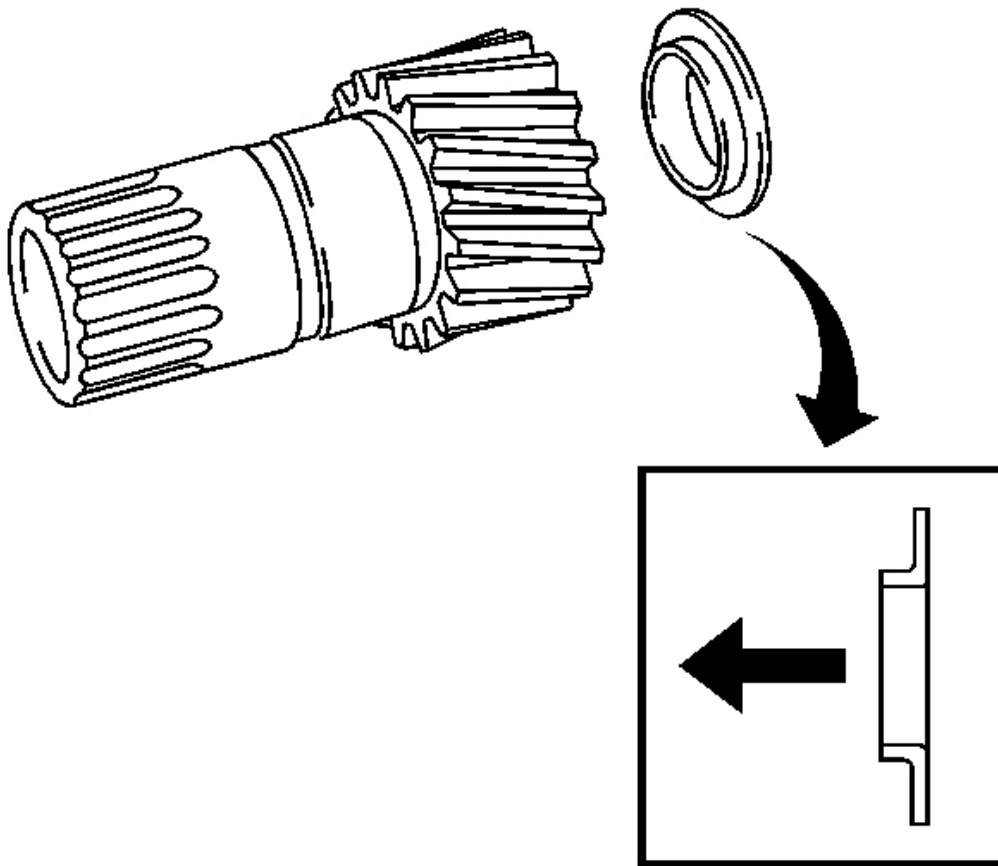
Thrust Bearing Race & Front Planetary Sun Gear
